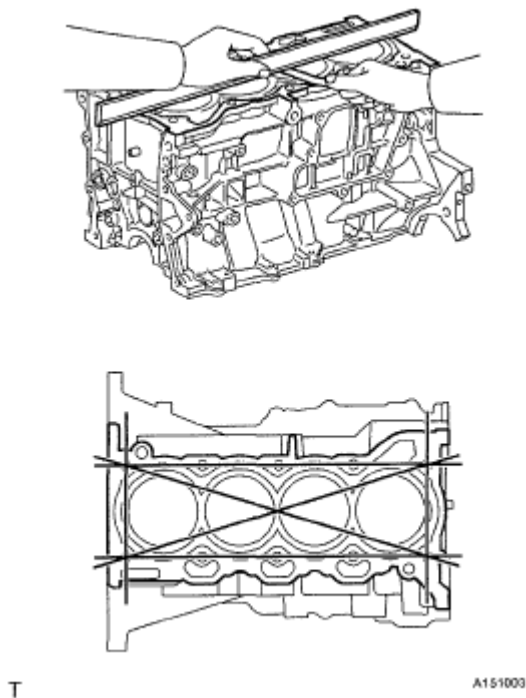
Inspecting Cylinder Block For Warpage
